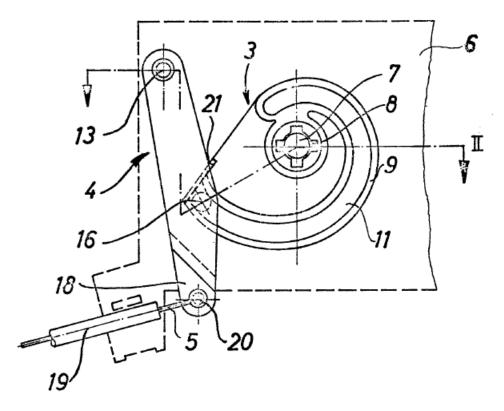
illustrates a gearing comprising primarily only a cam (11) and a cam follower (16). Oscillating motion of shaft (7) is conveyed into oscillating motion of lever (4).
